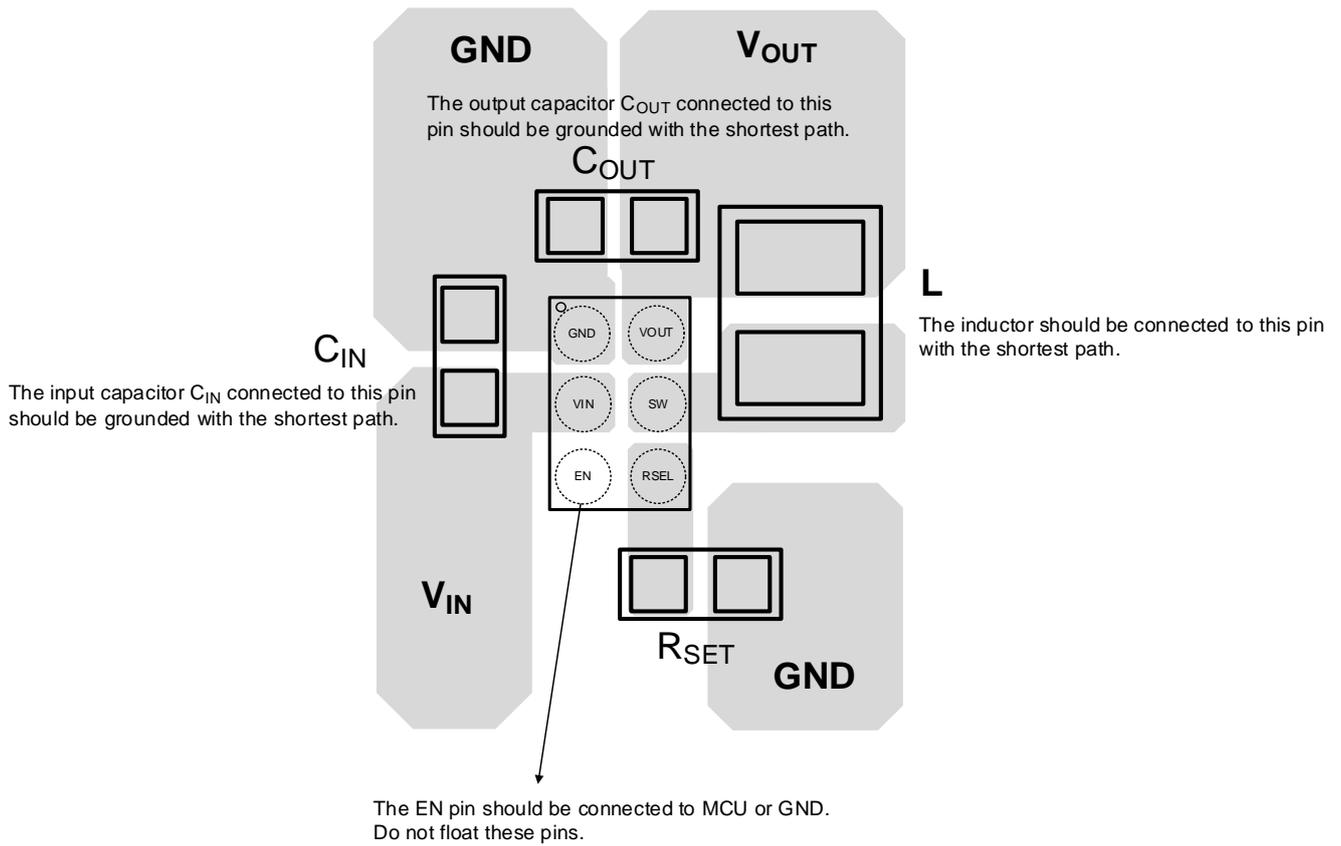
PCB Layout Guide for XWL-CSP-6B 0.96x1.245 (BSC) Package
